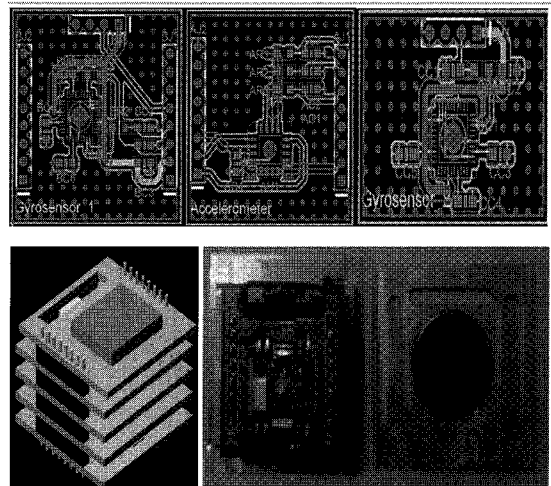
Tansmitter(Sensor system) PCB design and Hardware Configuration
